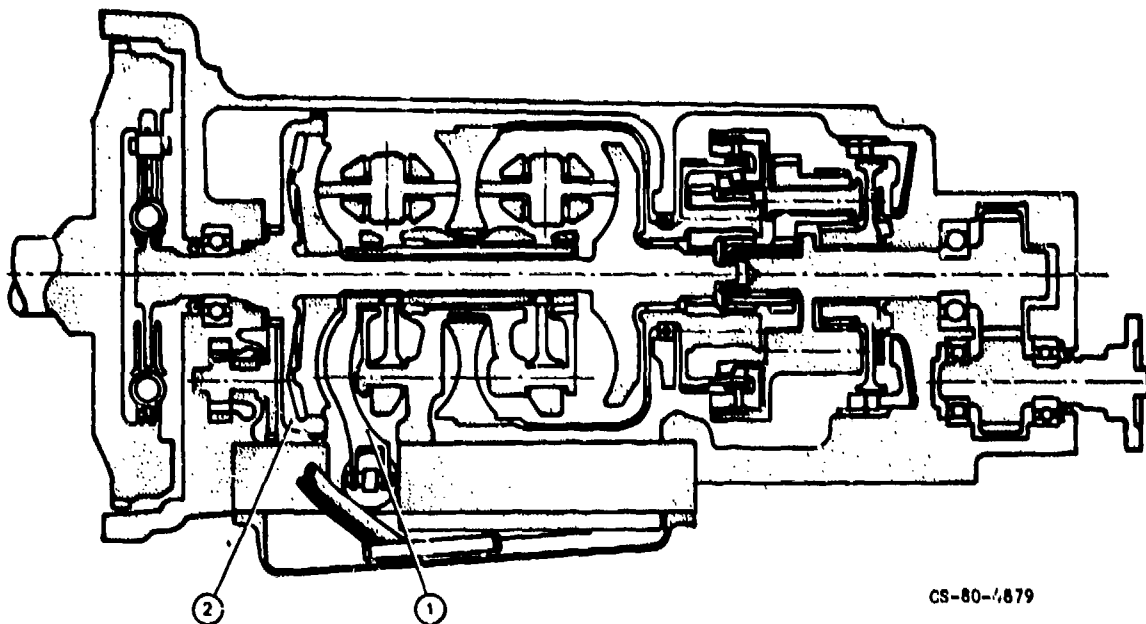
BL Technology/Perbury traction CVT, 60-kW passenger car test installation (ref. 90).
